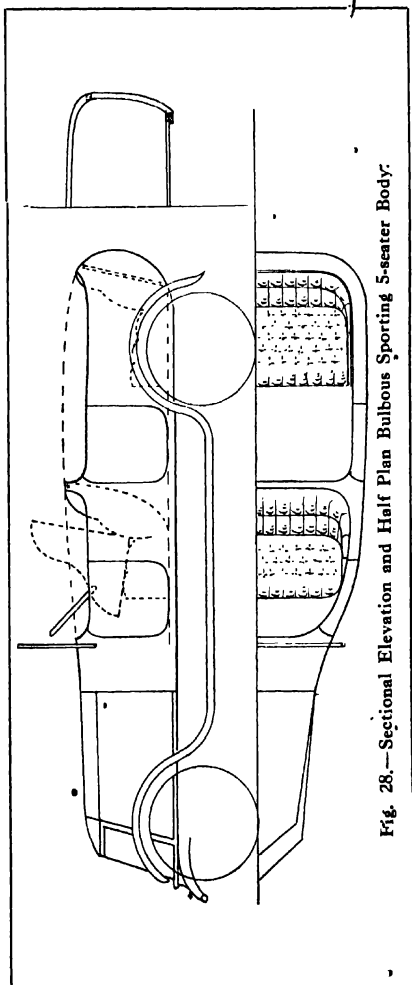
Sectional Elevation and Half Plan Bulbous Sporting 5-seater Body.
